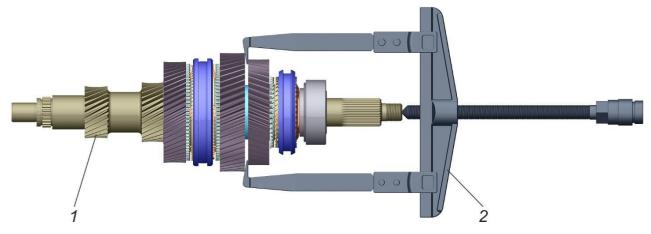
Reverse gear removal: 1 – secondary shaft assembly; 2 – universal puller
